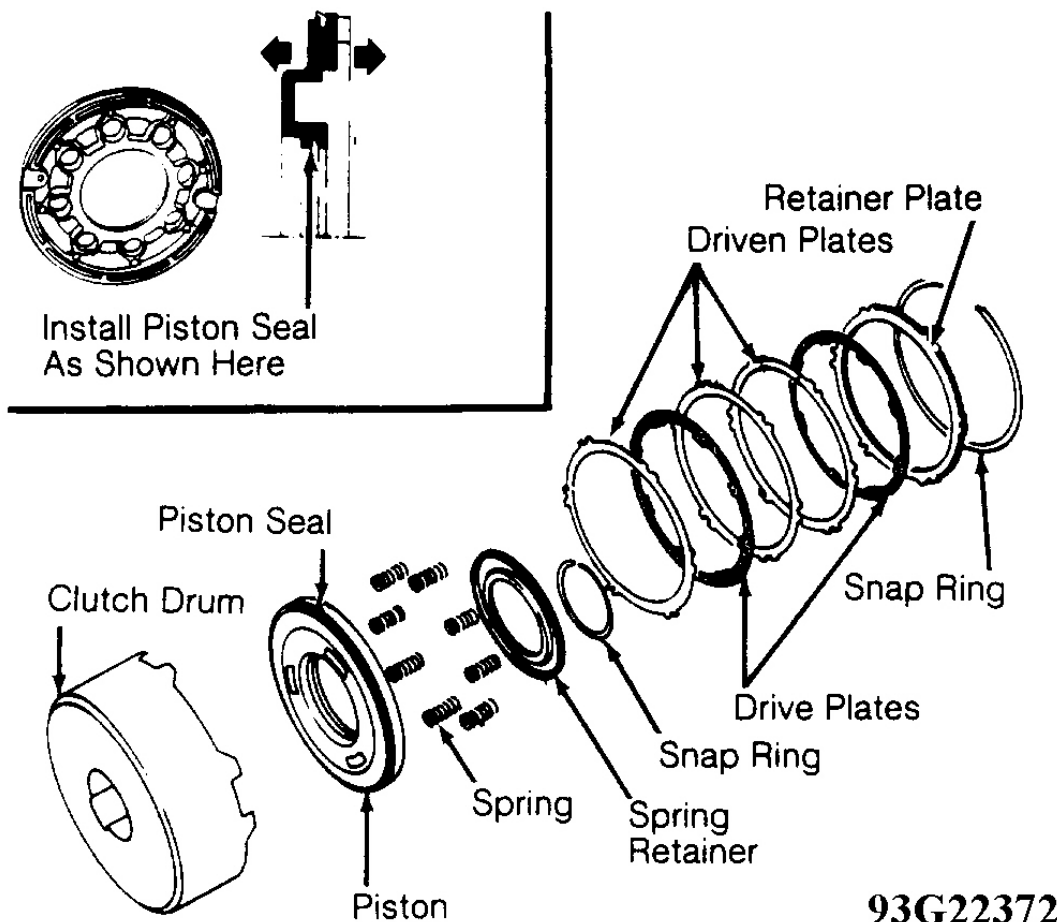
Exploded View Of High-Reverse Clutch Assembly
